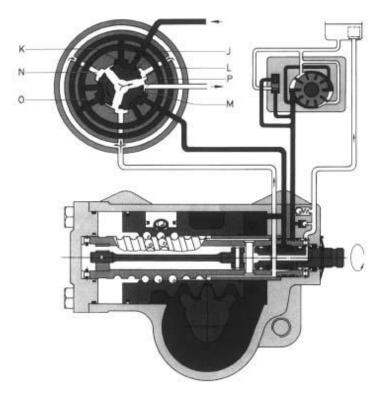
Steering gear models ZF8095 and ZF8098 left turning working principle sketch J-Oil Inlet and oil return line closed K-Connected oil inlet L-Connected oil return M-Oil inlet and oil return closed N-Connected oil return O-Connected oil inlet P-Oil return port
